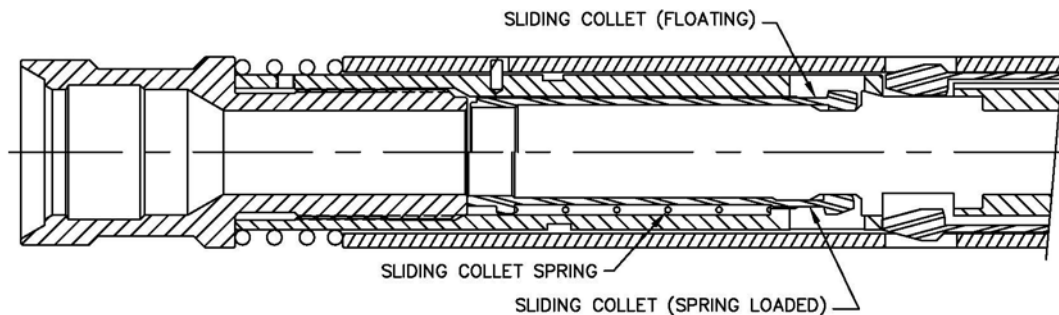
Schematic of Probe Deployment Tool latch assembly.
